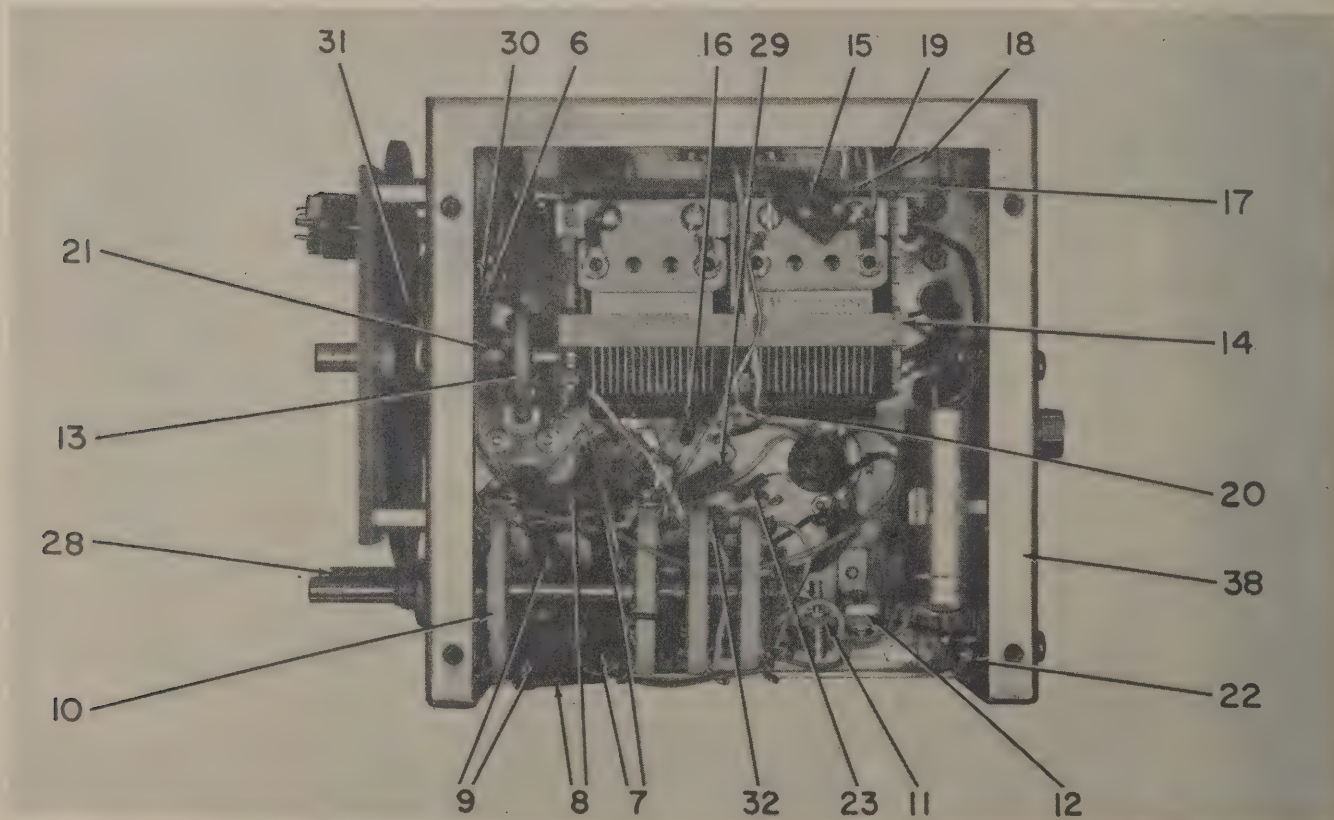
B. R-C Oscillator Chassis Assembly-Interior View (Sheet 1 of 2)
